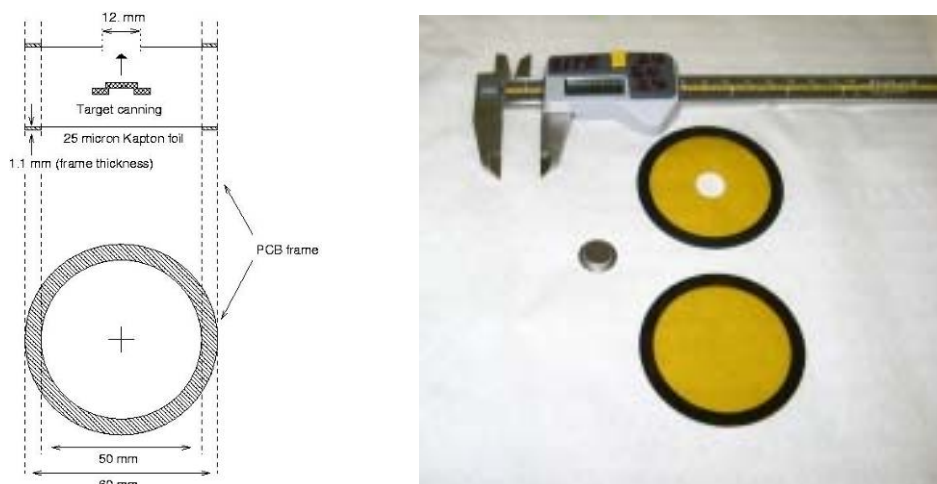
Scheme of the target assembly. Right: picture of a ^{237}Np target and the frame.
